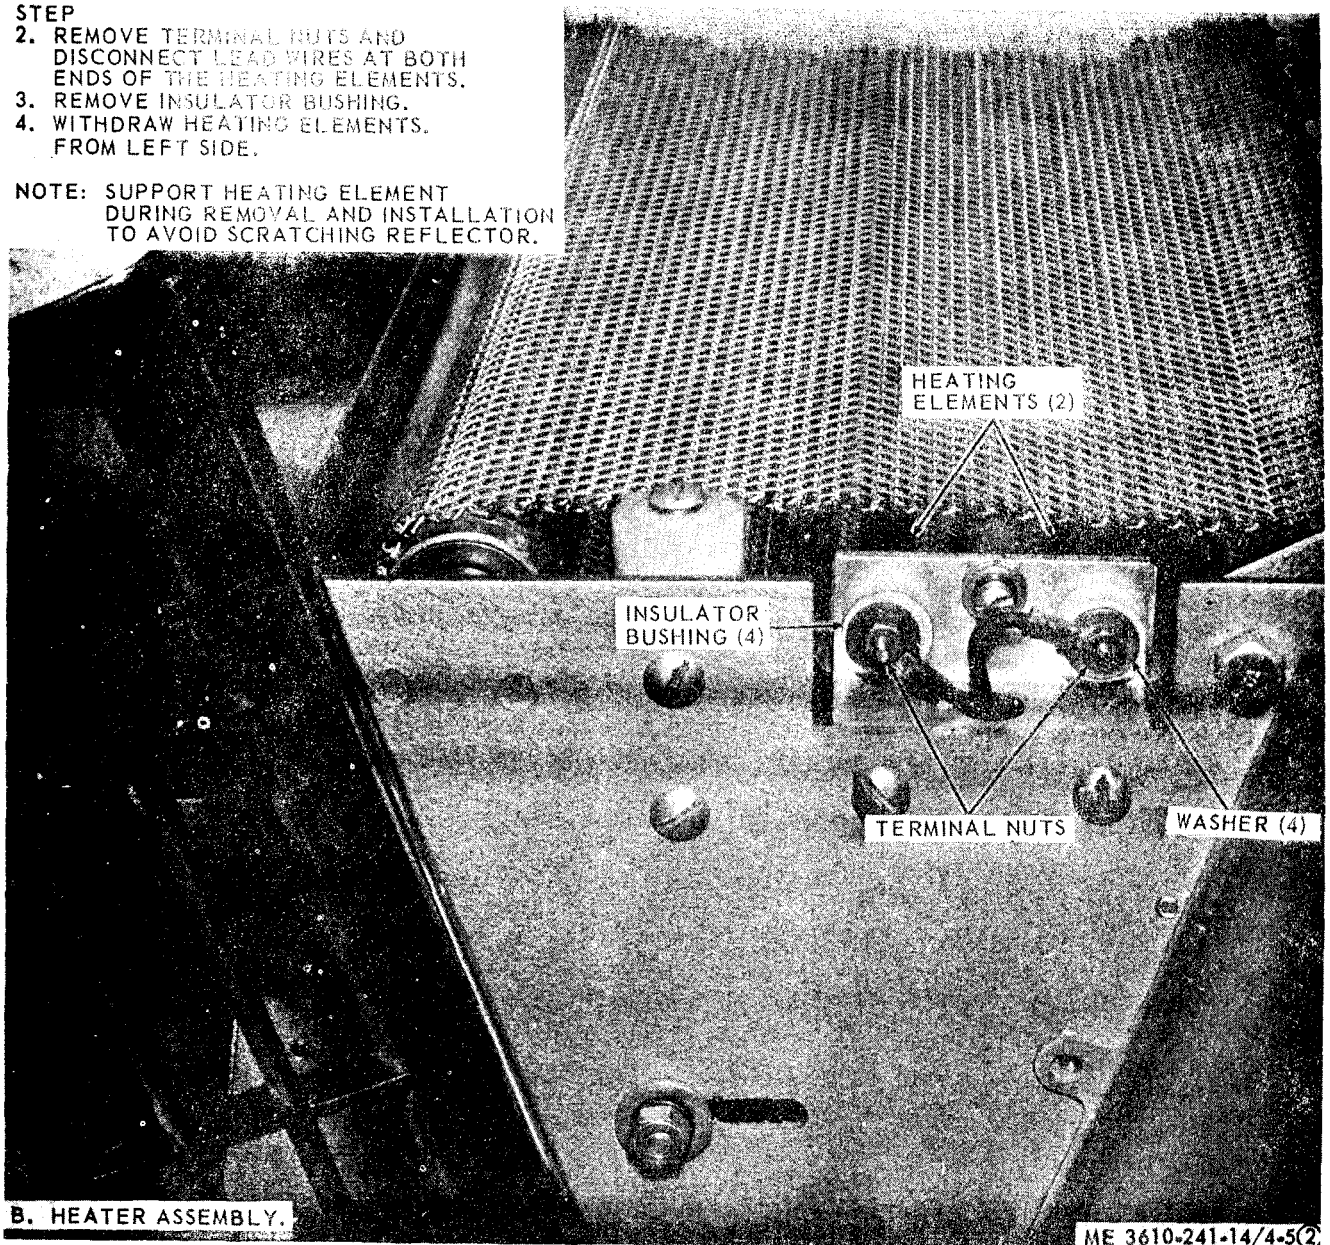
Heater, removal and installation (sheet 2 of 2).
